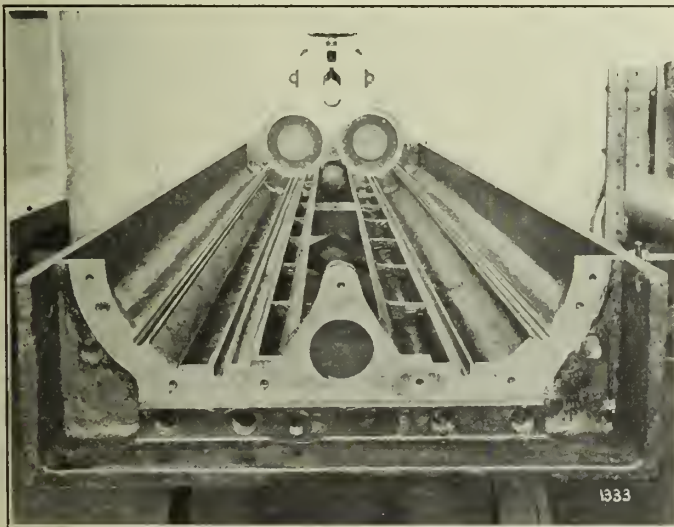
Vacuum Dryer Type 11-48-154, Outgoing Seal Casting—showing Grooves for Rubbers and in the Rear is shown End Frame with Roller Bearings in Place Ready to Receive the Two Bronze Covered Rolls and the Rubber Covered Roll.
